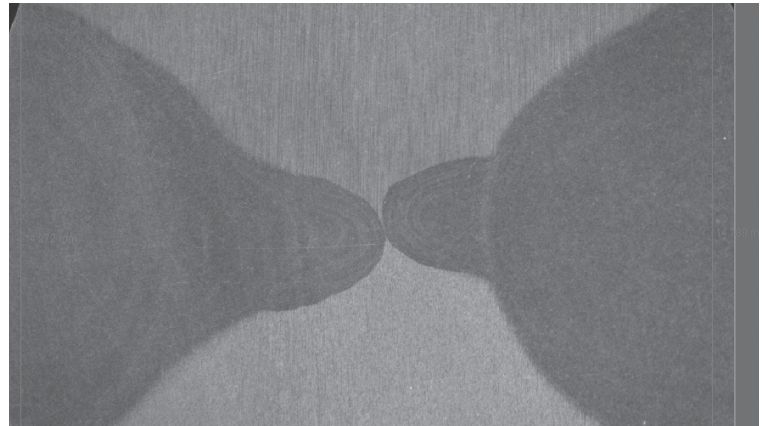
Cross section of weld showing incomplete fusion
